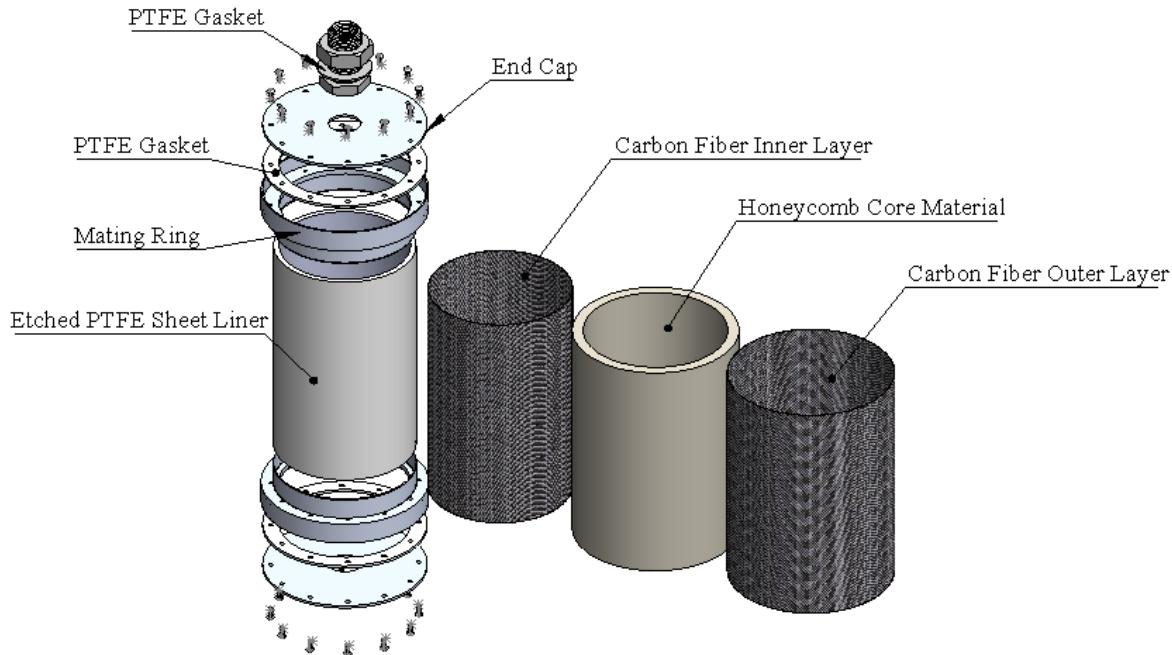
Exploded View of Initial Sheet-Liner CAD Design
